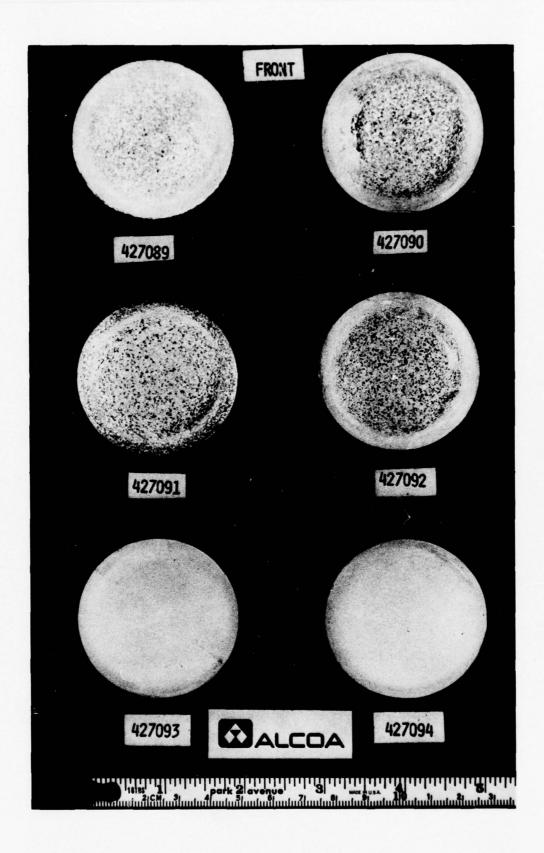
Etched Slices Removed from Front of A1-Mg-Li Extrusions
